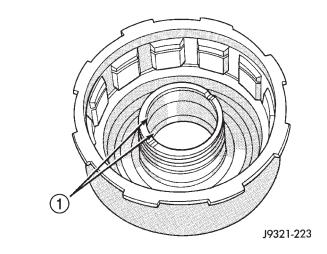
Retainer Bushing Location/Inspection 1 – FRONT CLUTCH RETAINER BUSHINGS (NON-SERVICEABLE)
